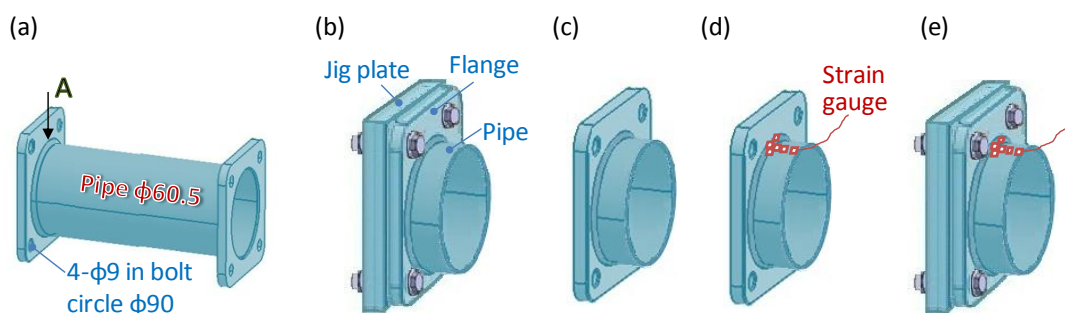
Schematic view of sample and measurement procedure. (a) As-welded; (b) Cut and fastened with 4 bolts, X-ray measurement; (c) Released, X-ray measurement; (d) Released, strain gauge attachment; (e) Fastened with 4 bolts, strain gauge measurement
